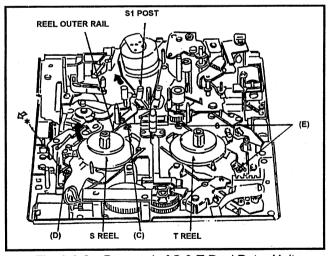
Removal of S & T Reel Rotor Unit
